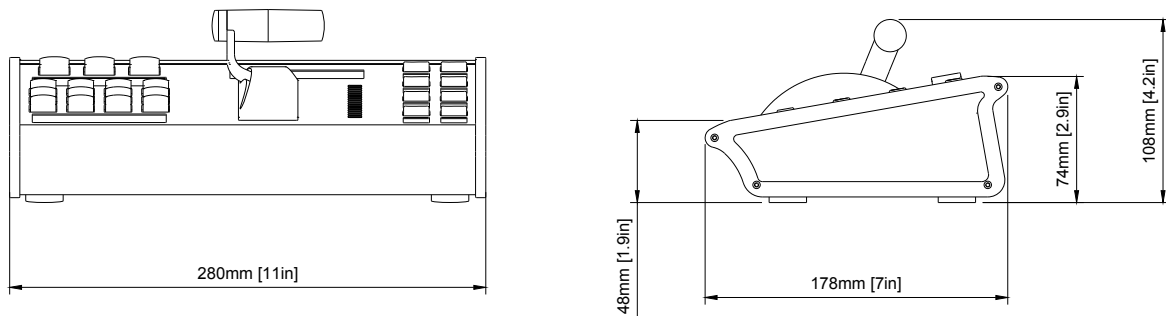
Technical drawing of T-Block Left with key dimensions and layout details.
